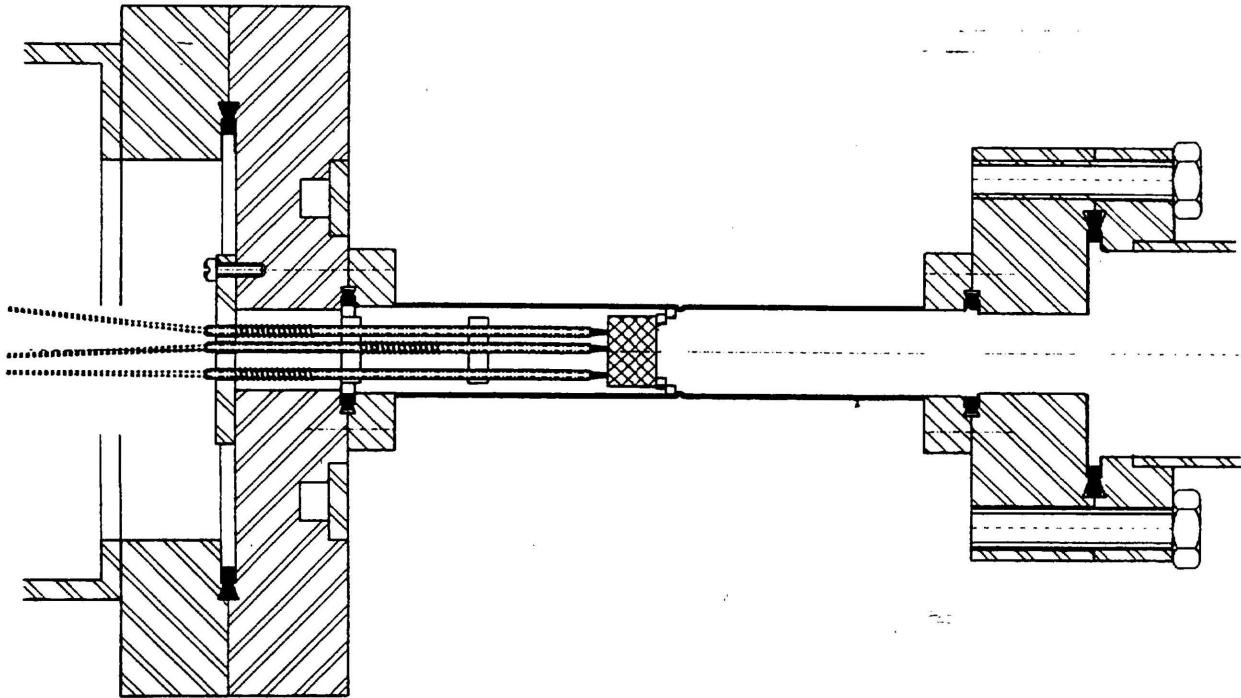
A section of the target chamber, showing the pellet mounting technique, the spring-loaded thermocouples. The electron beam enters from the right.
